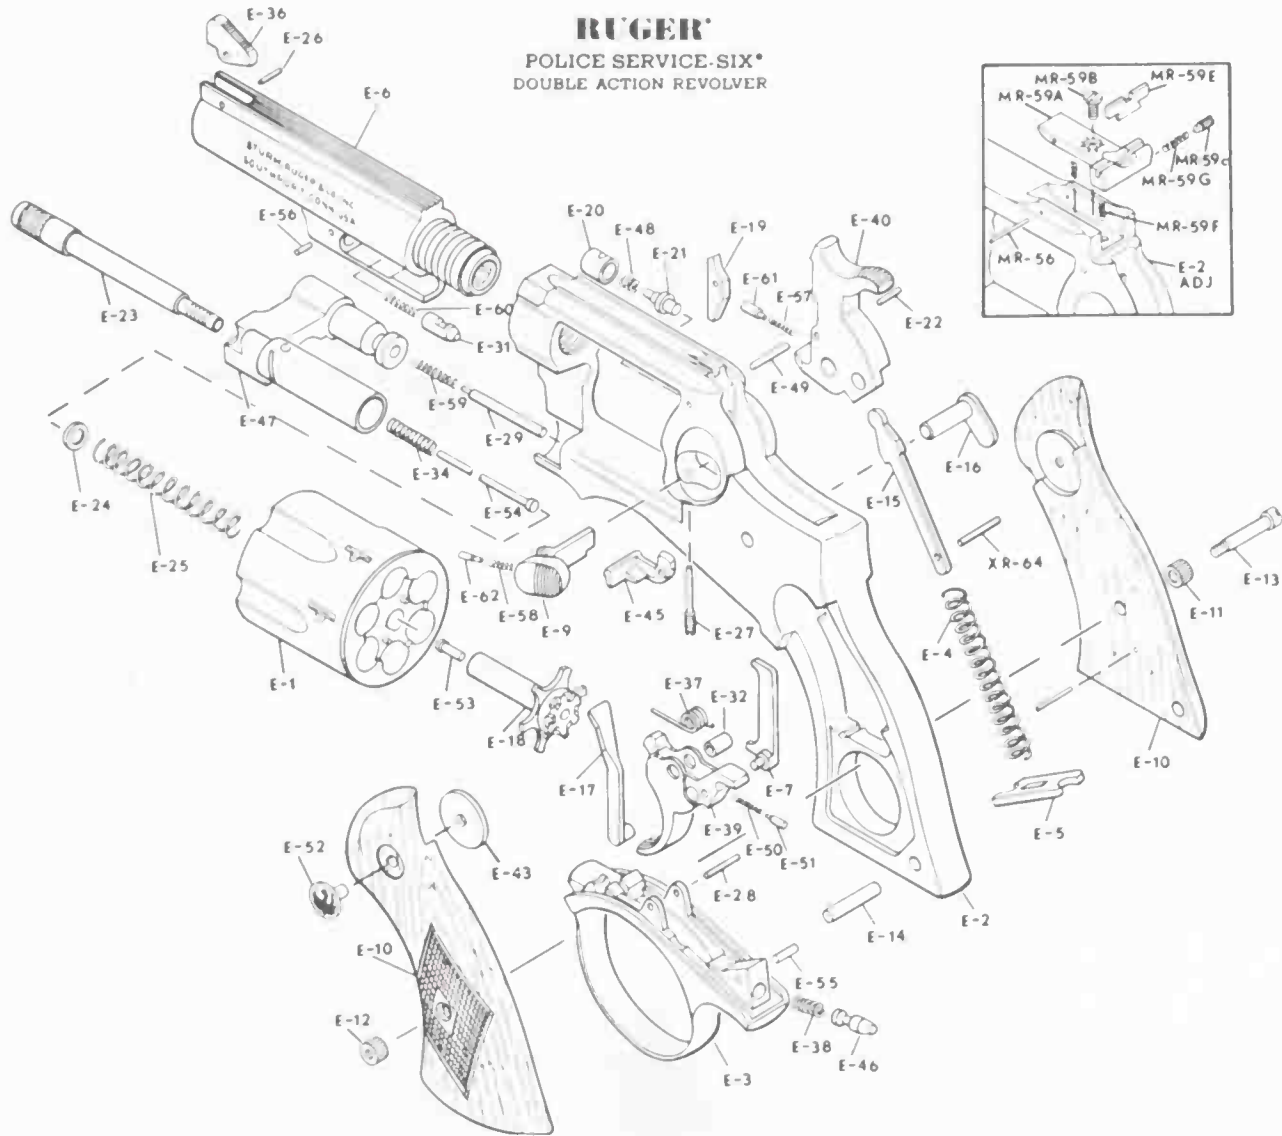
An exploded view of the Ruger Police Service-Six. Such drawings, available from the manufacturers for most modern firearms, are a great aid in disassembling and assembling firearms since they show the relationship of all parts.
